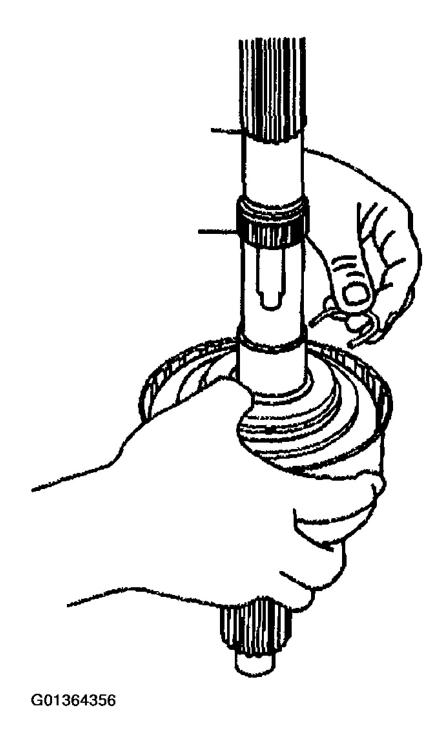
Removing Clutch Pressure Plate Bearing Retaining Ring
